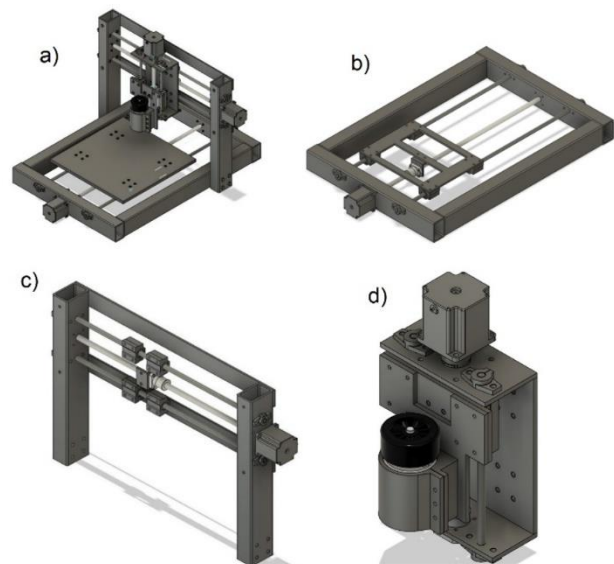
a) CAD model of desktop CNC milling machine, b) CAD model of X axis, c) CAD model of Y axis, d) CAD model of Z axis
